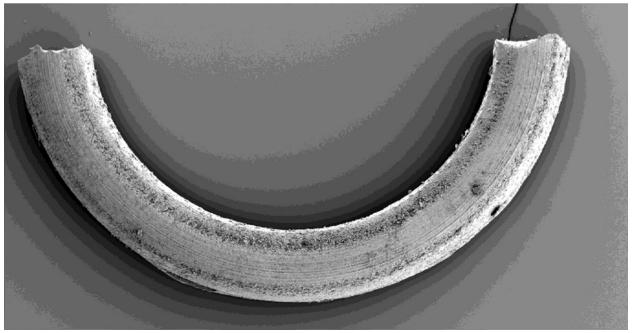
Photo of the O-ring which clearly shows that the surface of the O-ring is rough and fibrous, contains scale and was torn at the left bottom.
